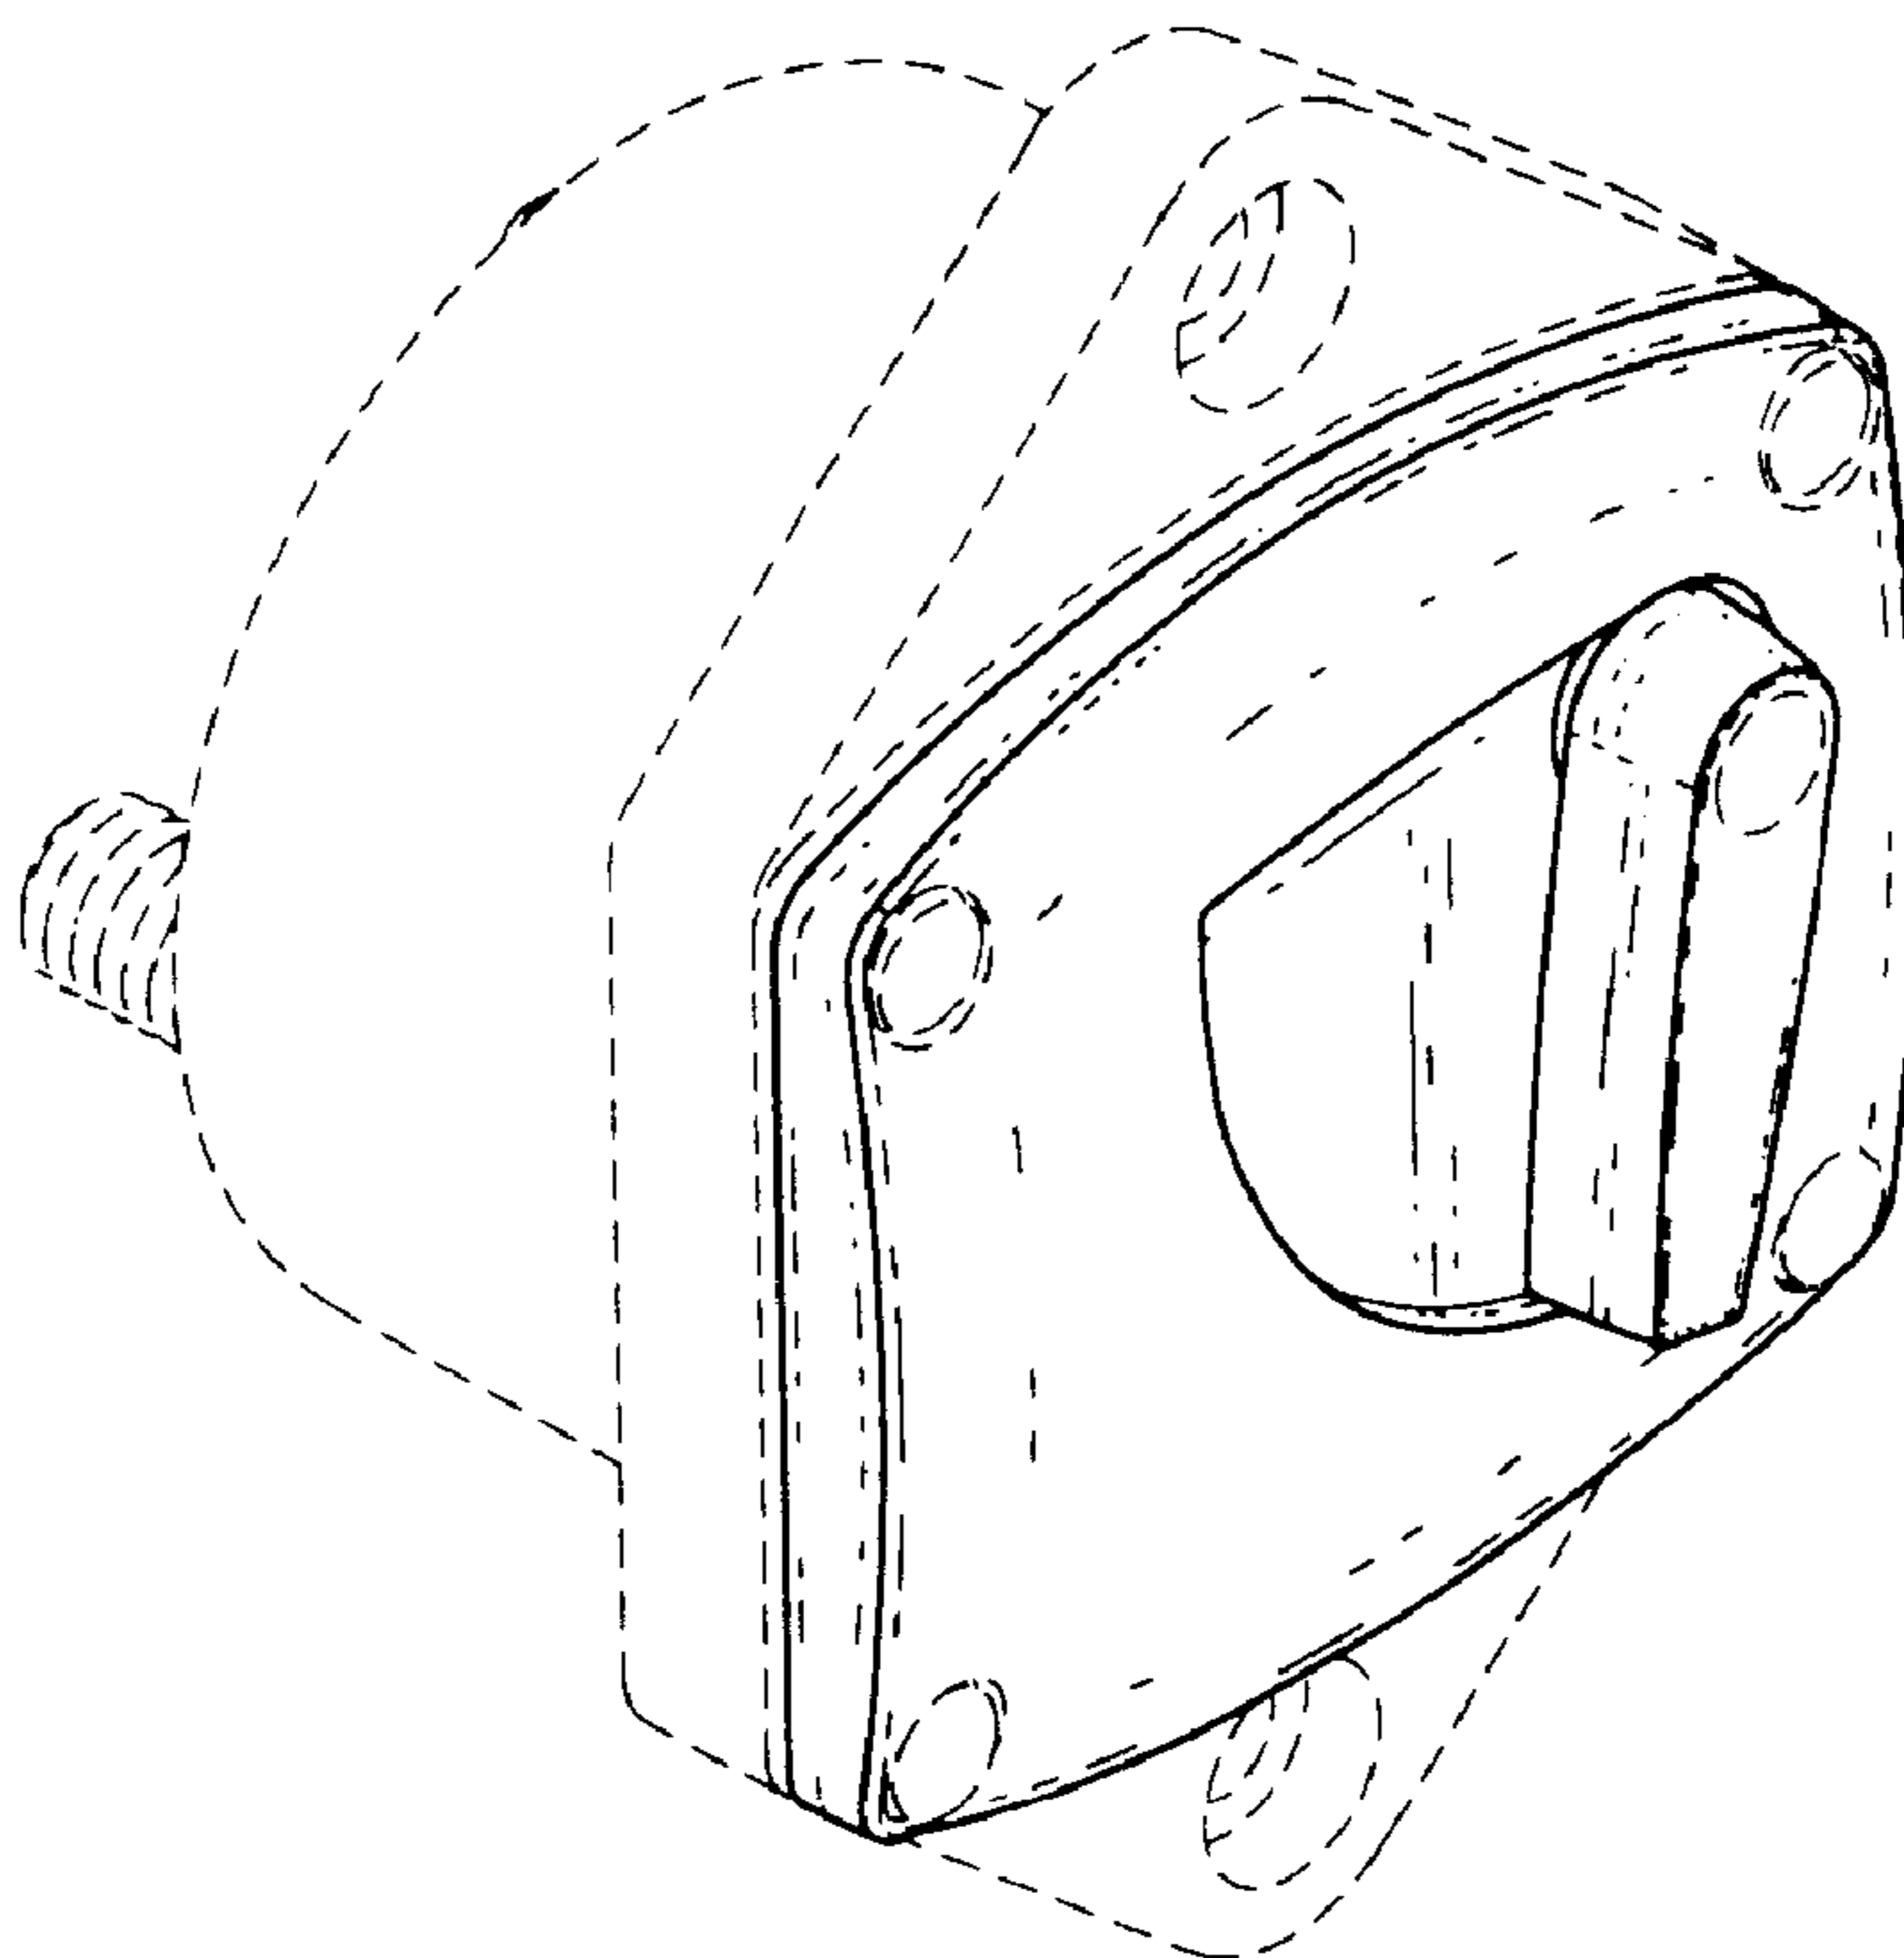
is an isometric view of a circuit breaker face showing my new design;
